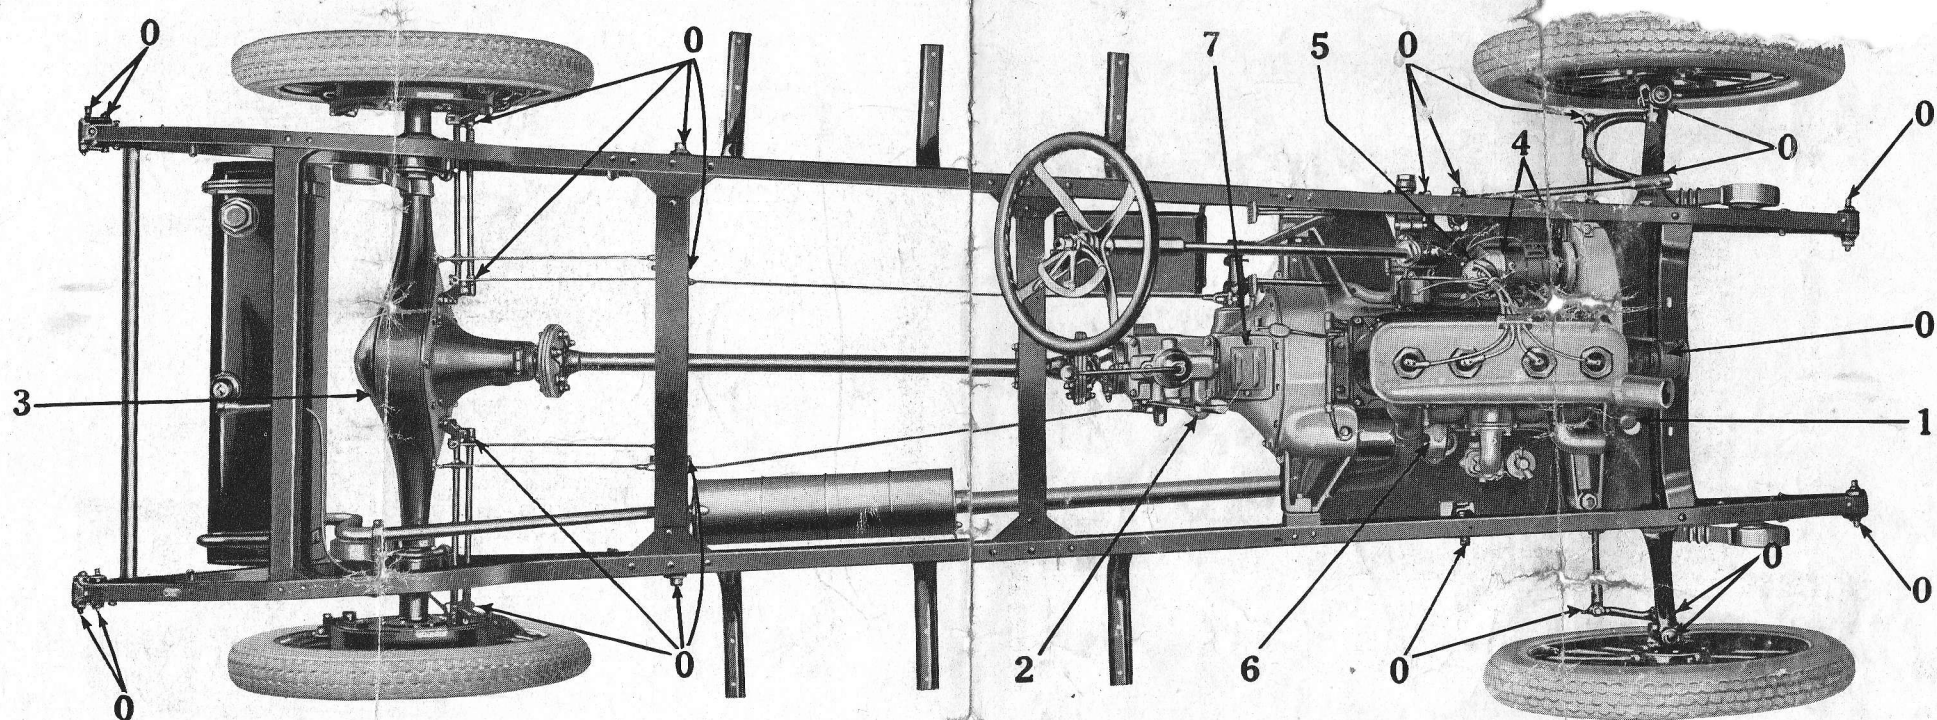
CHASSIS, SHOWING POINTS REQUIRING LUBRICATION
